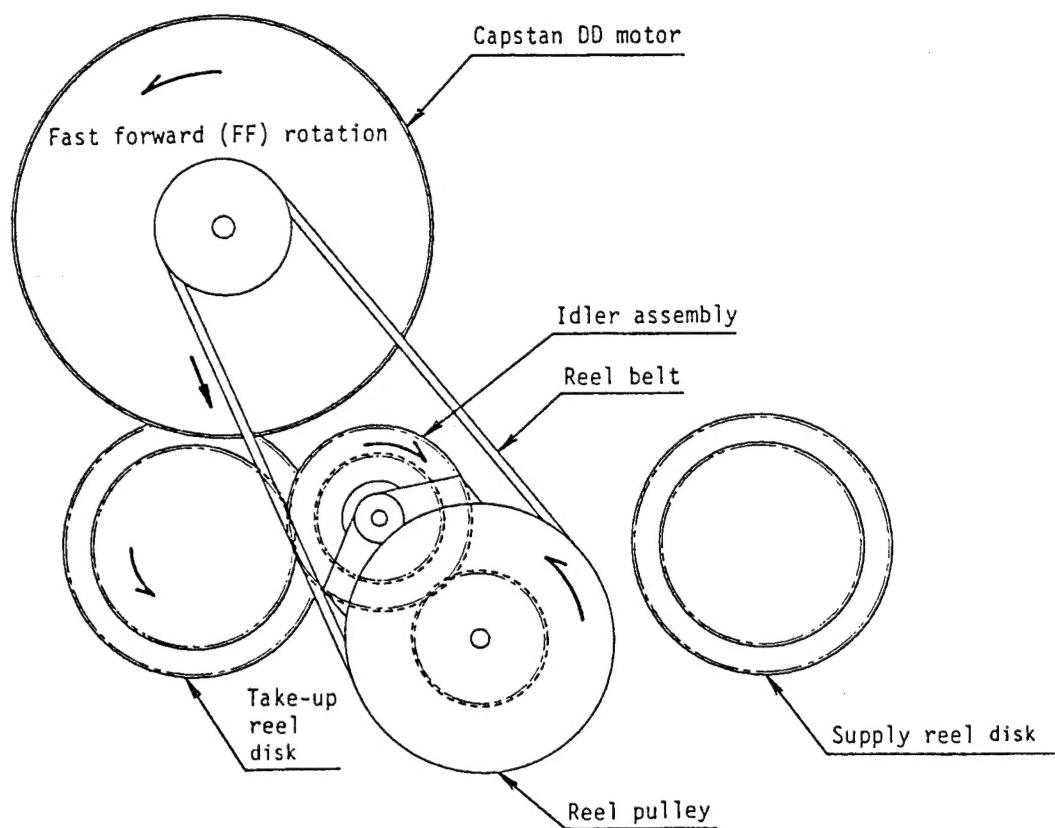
Cassette Tape Take-up Mechanism 1 (Lower stage)
